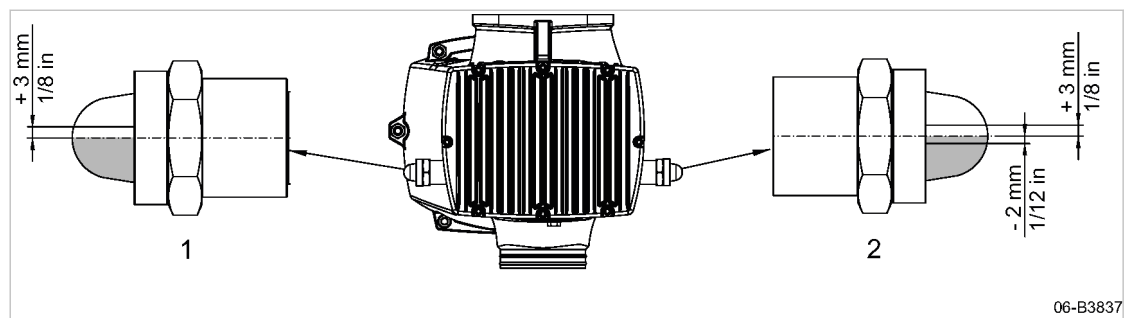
Adjusting lubricating oil level in cross direction (90 degrees to the motor shaft)
